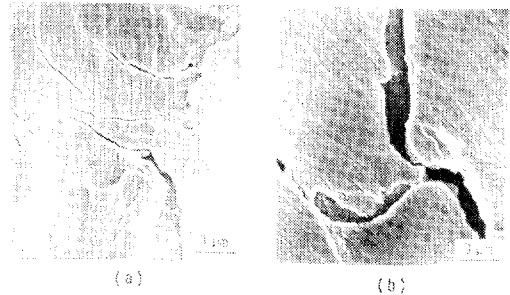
SEM photographs of the weld interface surfaces of Al-Al after fracture (a) R=6%, (b) R=25%
